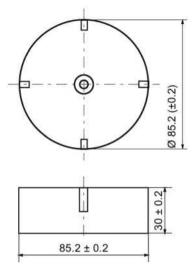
Dimension drawing of spacer 6GT2690-0AA00
